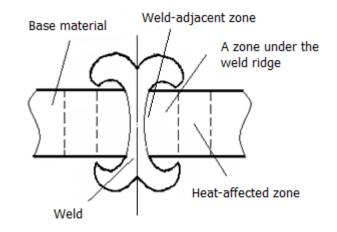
Separation scheme of the zones of butt-weld joint.
